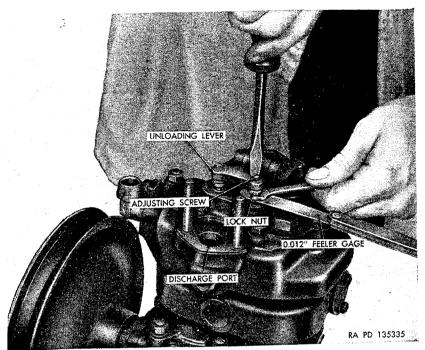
Checking and adjusting air-compressor unloader valve clearances.
